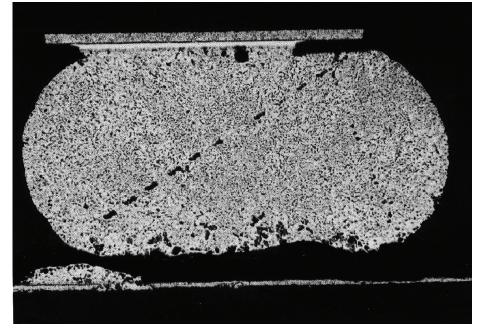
Microsection through a ball showing non-wetting of solder to pad: Reject
